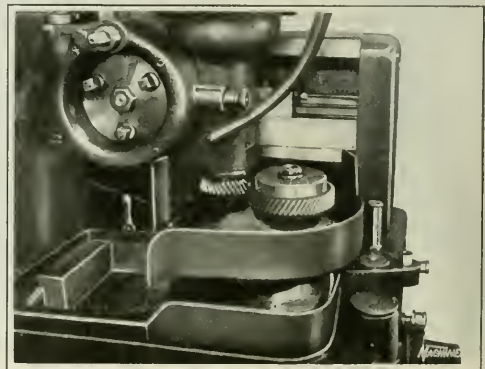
Cutting an Automobile Engine Helical Timer Gear on the Gear Shaper
